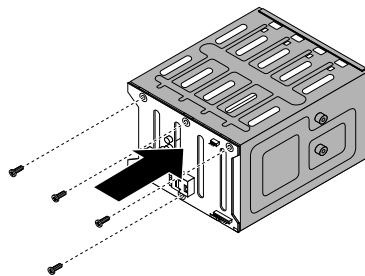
Installing the 3.5-inch hot-swap hard disk drive backplane
